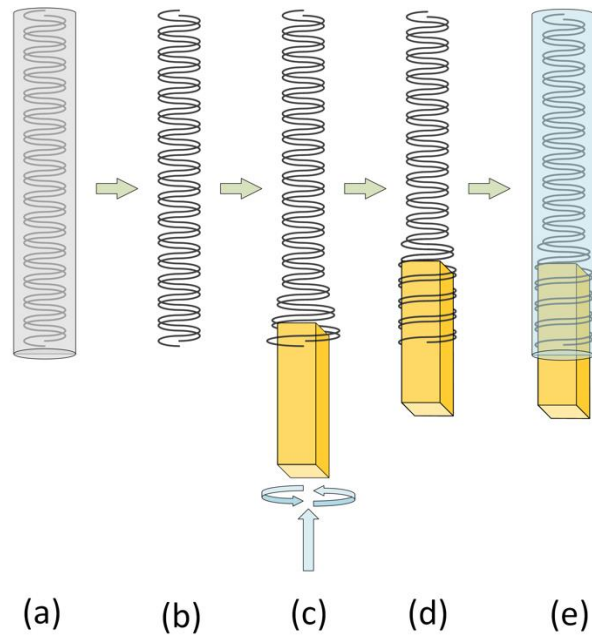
The ridged outer insulation on the helical lead shown in (a) is stripped off using a scalpel (b). (c) The helical wire is screwed onto a gold plated pin. (d) The pin has a larger diameter than the inner diameter of the helical lead, so a strong connection is made between the pin and the lead. (e) The helical lead is slipped into a flexible silicone tubing. This tubing provides a biocompatible insulating layer around the lead.
